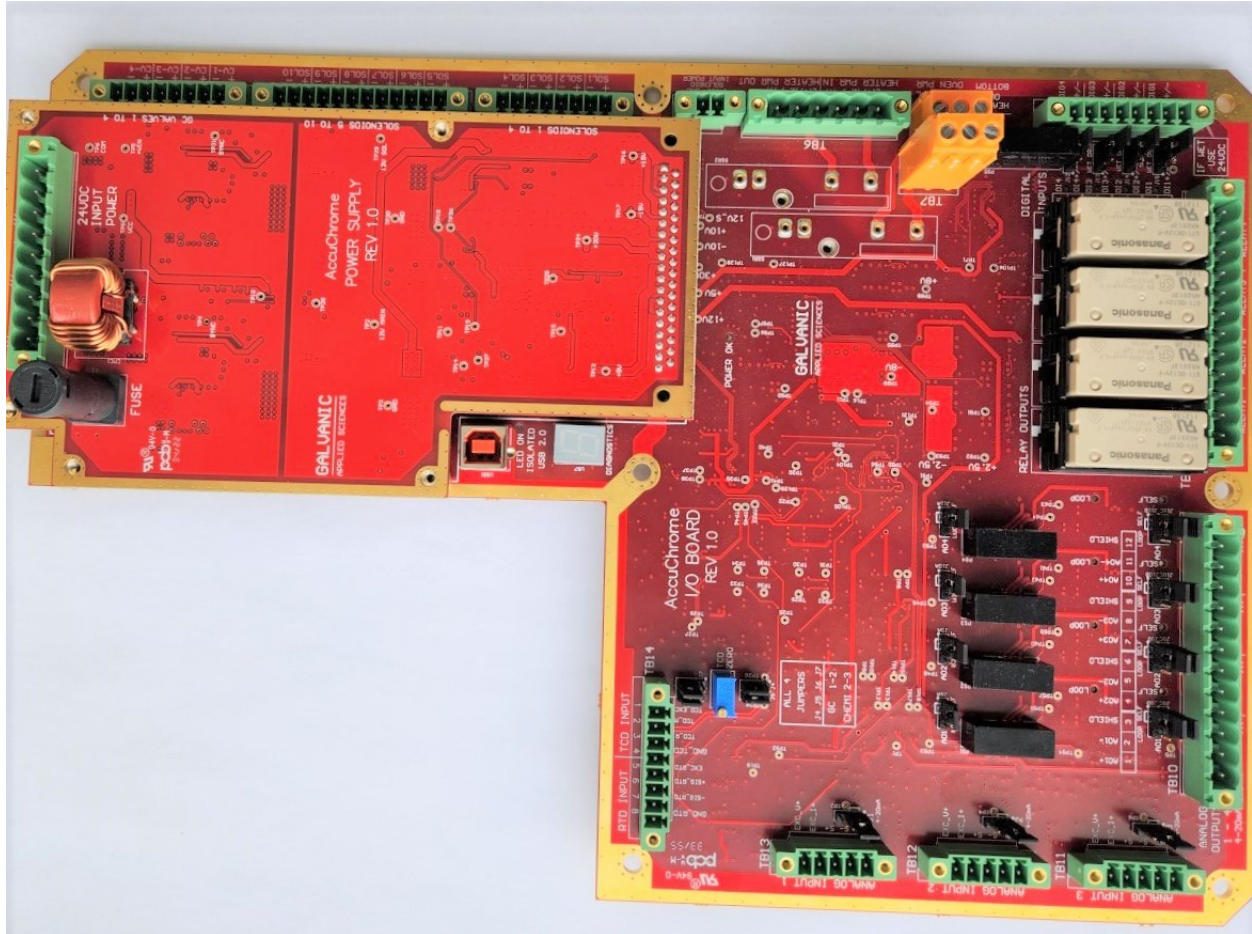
AccuChrome I/O board assembly, SA3184. Terminal block plugs not shown.
